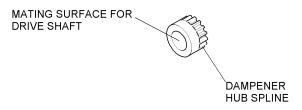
Inspecting Drive Shaft and Dampener Hub
